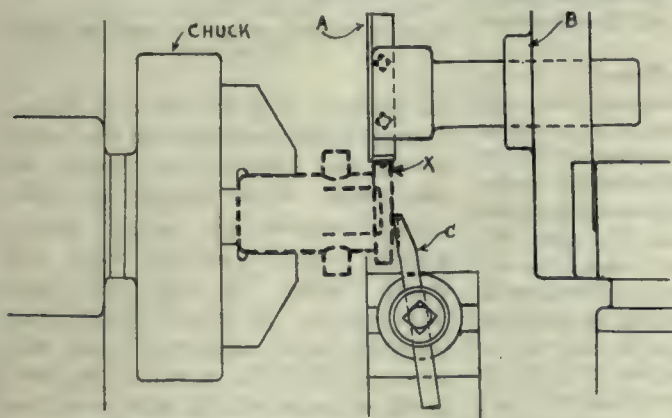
TURNING AND FACING CLOSED END OF PIECE.
